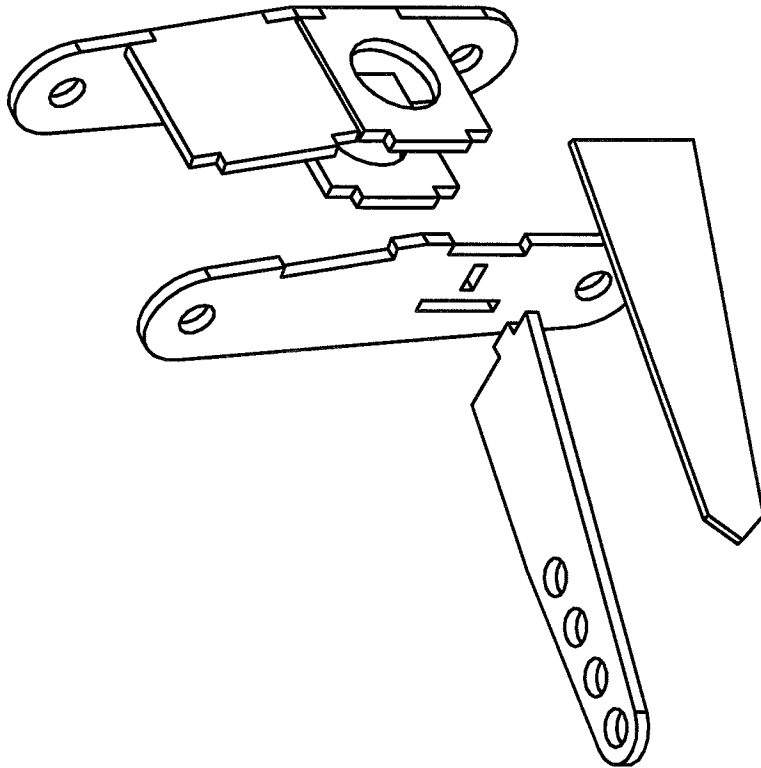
PLATEWORK DETAILS FOR FRONT SPINDLE CARRIER
